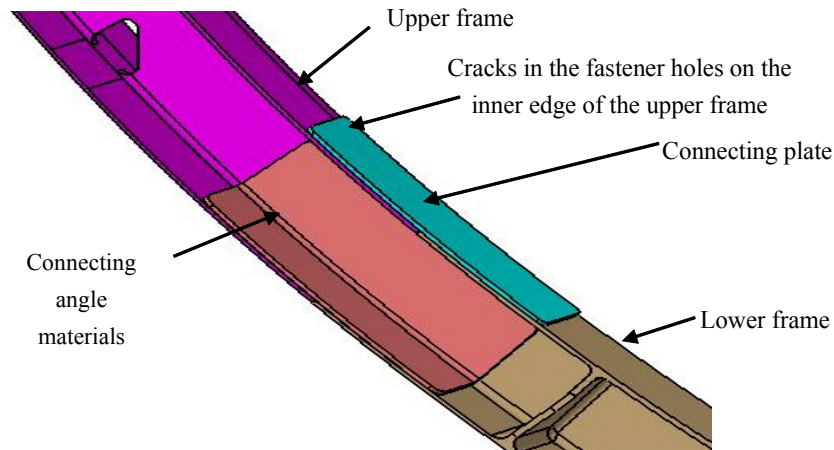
Crack in the fastener nail holes on the inner edge of the reinforcement frame in the docking area of a civil aircraft
